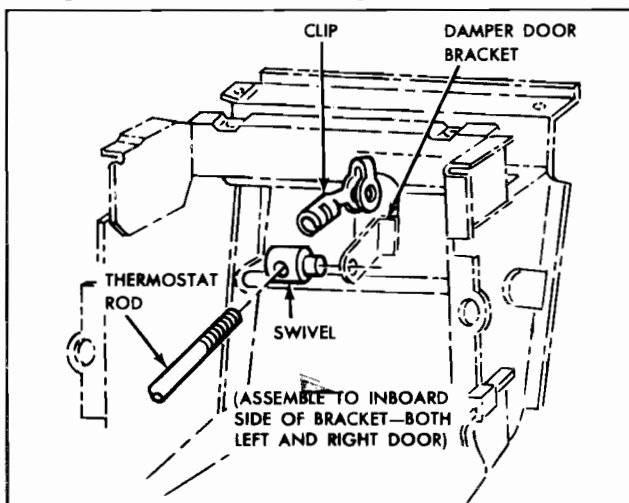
Thermostat Damper Door—(L.H. Shown)
